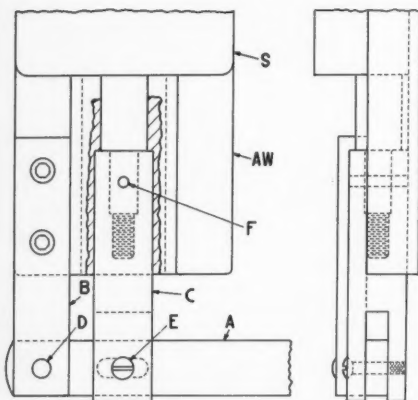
Drawing of Lever Mechanism for Operating Cross Slide
